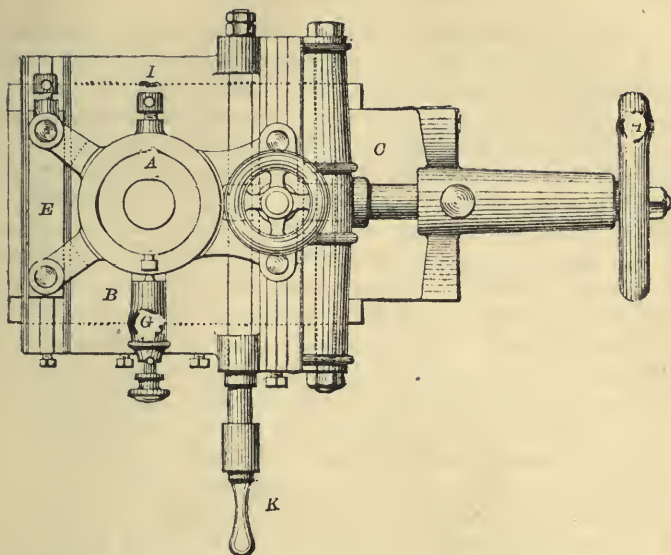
TOP VIEW OF MILLING APPLIANCE FOR LATHE.
